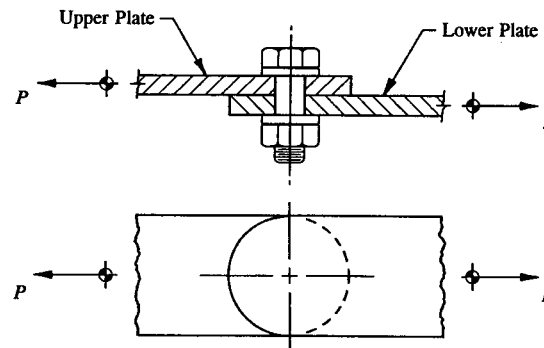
Single-shear lap joint in a tension-loaded joint.
